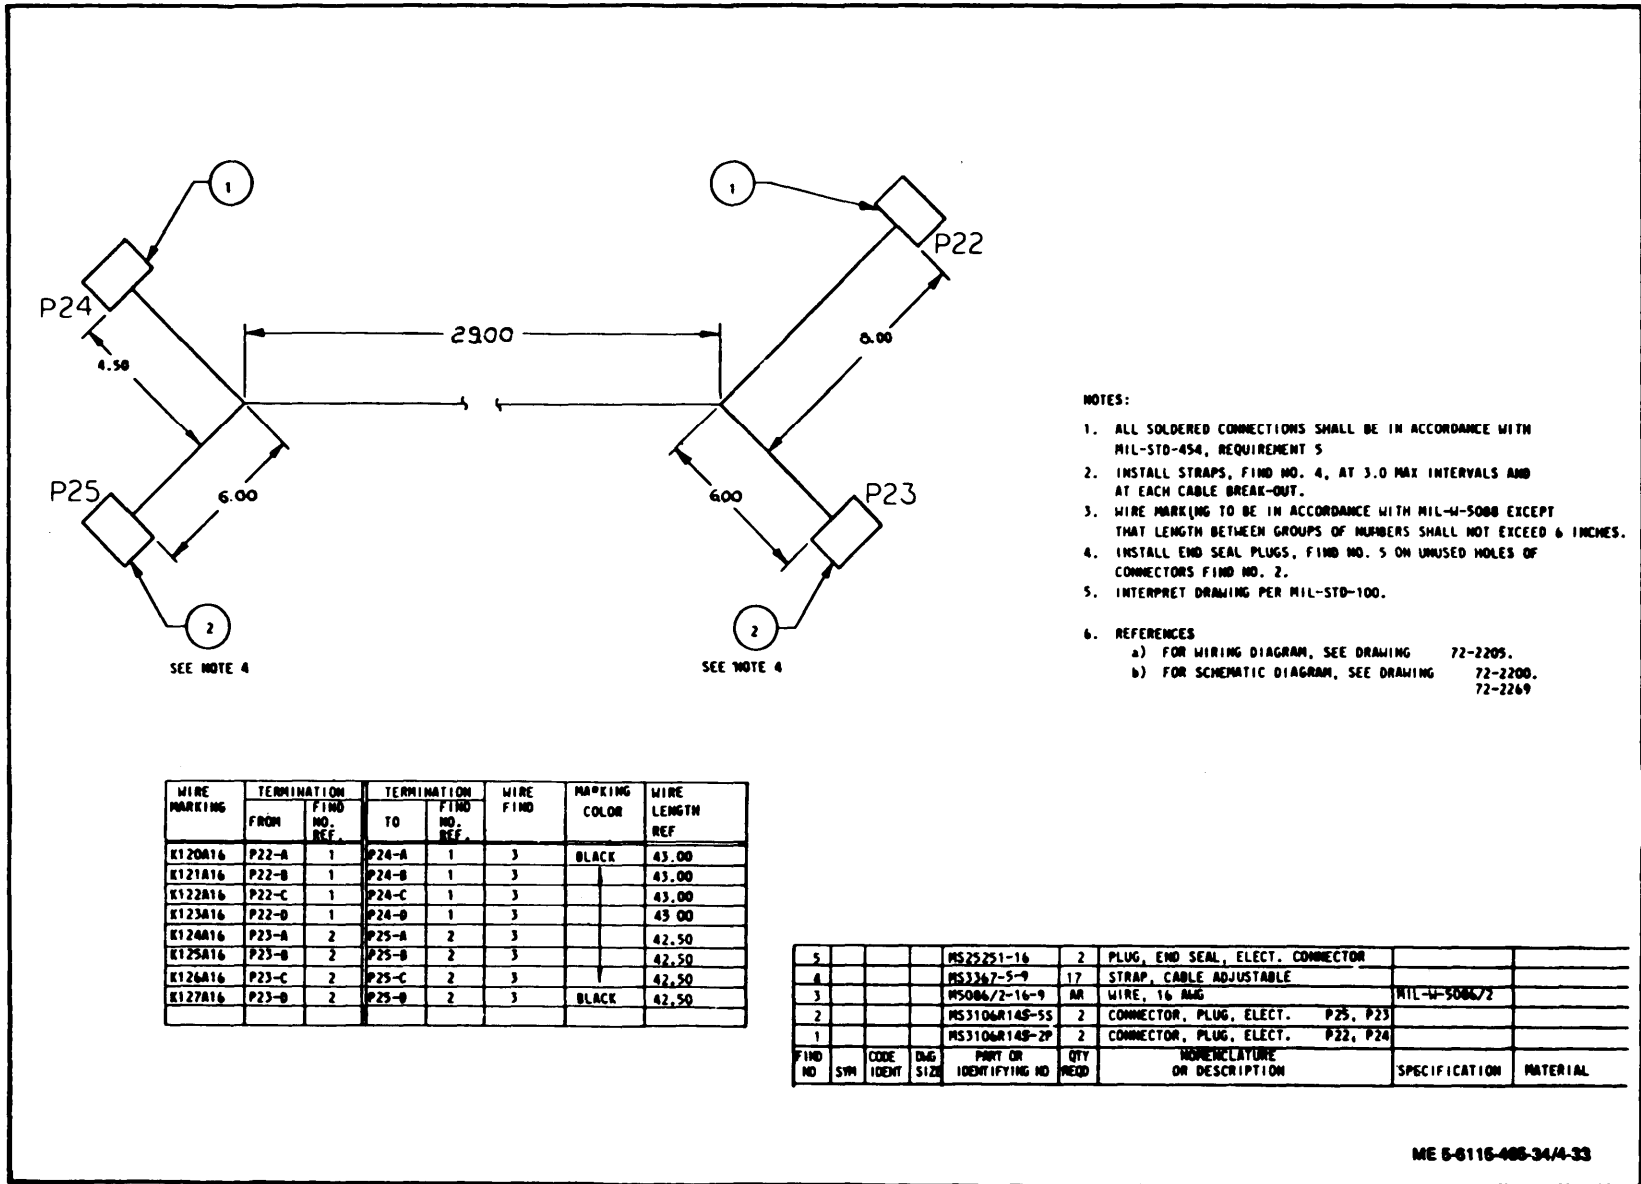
Governor Control Unit to Hydraulic Actuator Unit Wiring Harness, Drawing No. 72-2282
